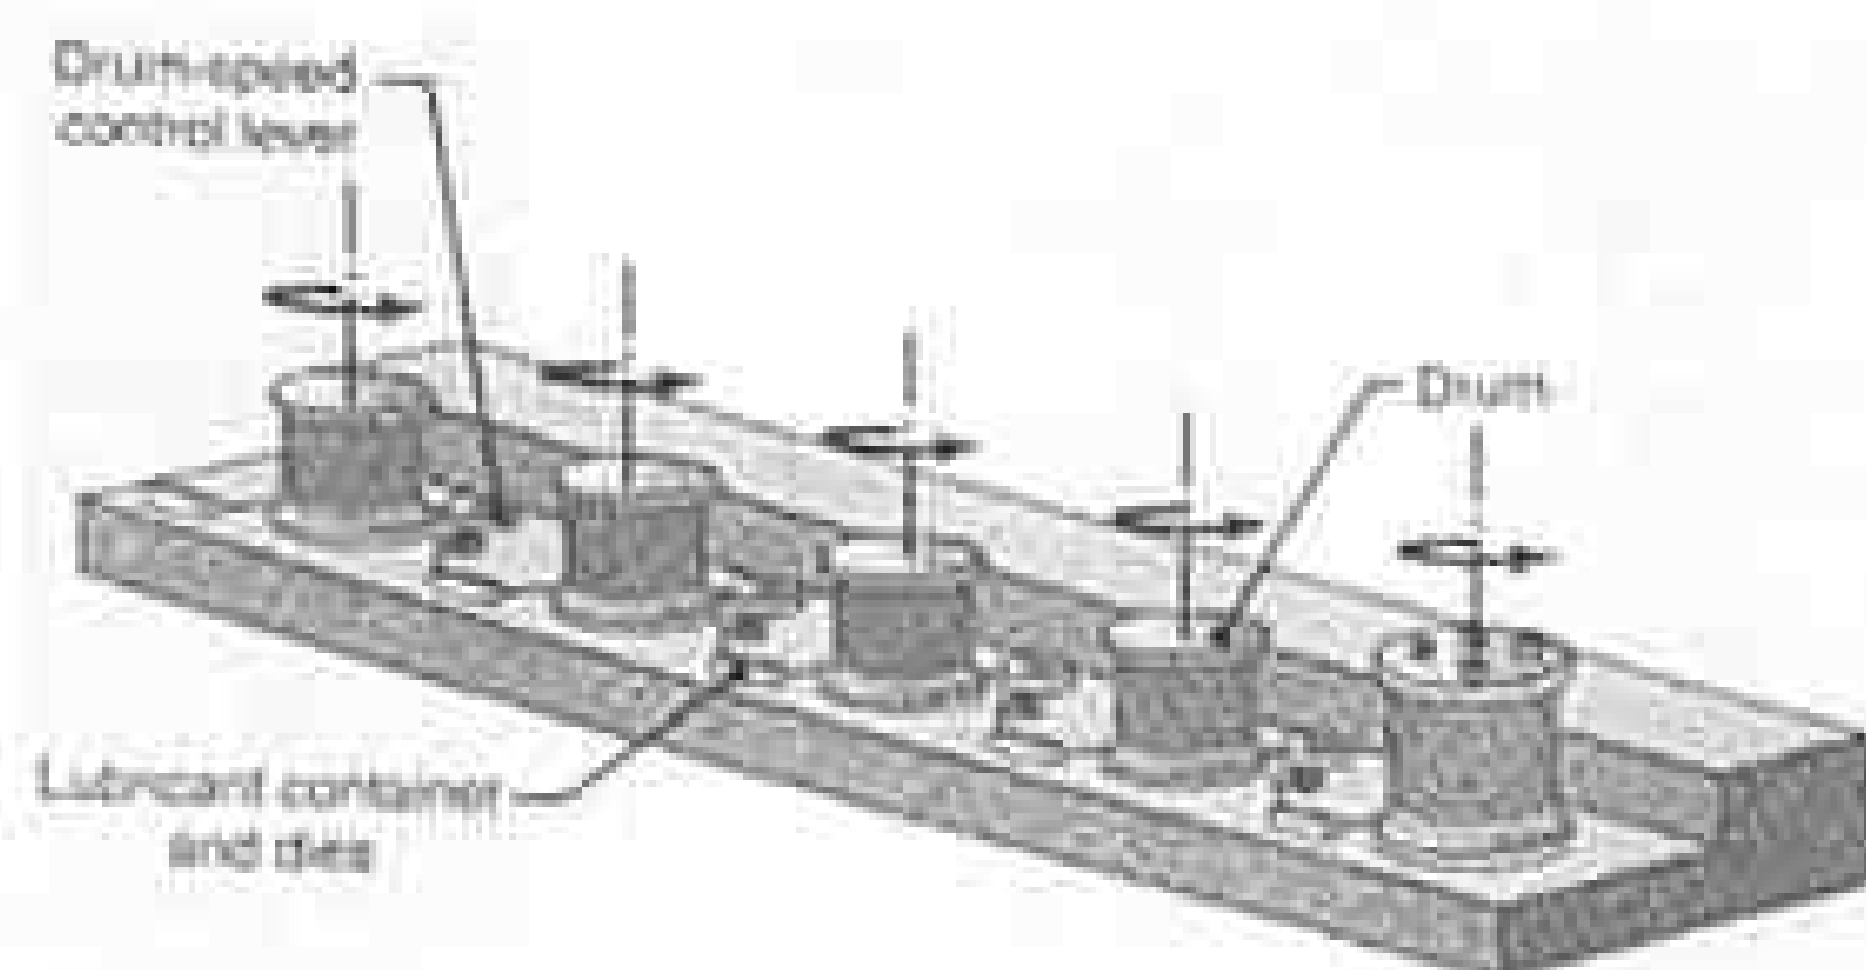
An illustration of multistage wire drawing typically used to produce copper wire for electrical wiring. Shown is a five-bull block configuration; wire drawing machines can incorporate 15 or more of these drums, depending on the material and wire size.
